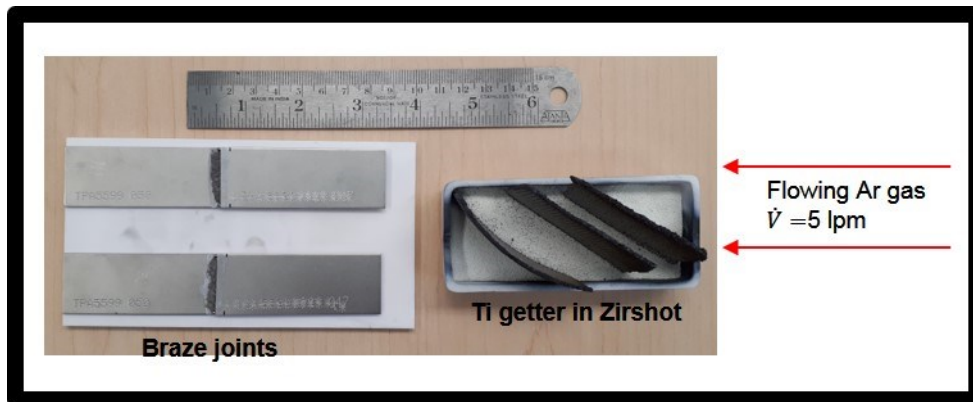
Internal set up of Sentrotech brazing furnace.
